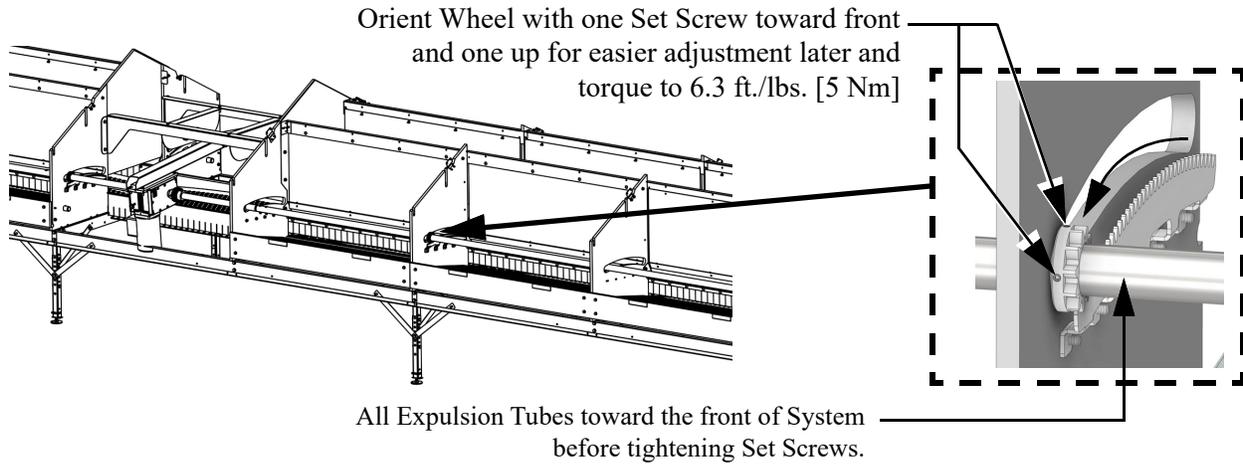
Tightening Down Toothed Wheels to Expulsion Shafts
